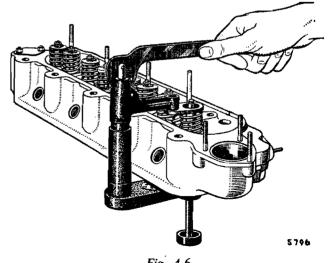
Compressing a valve spring, using the special compressing tool 18G45
